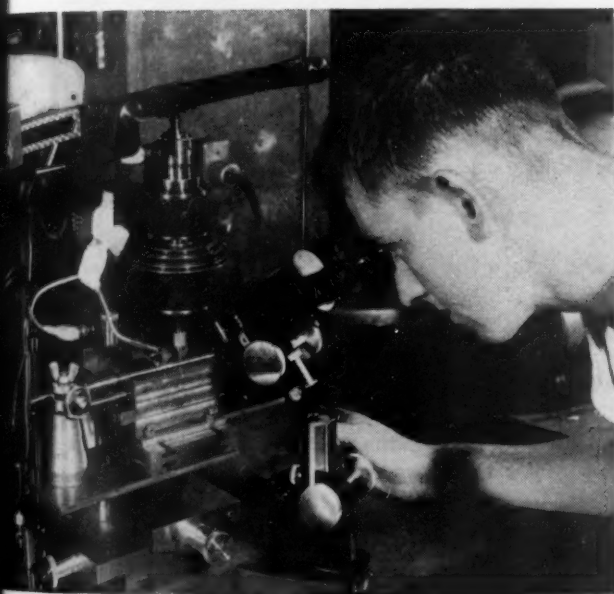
Parts from the set can be combined with other fixture devices as shown in this fixture for drilling fuel spray bars.
